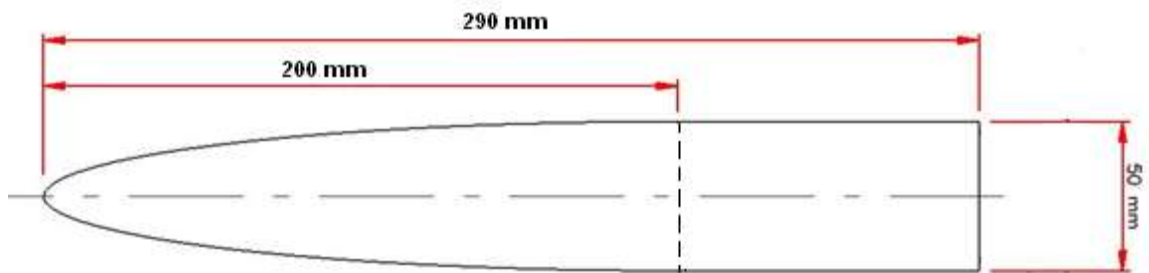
Schematic drawing of the base model with relevant dimensions.
